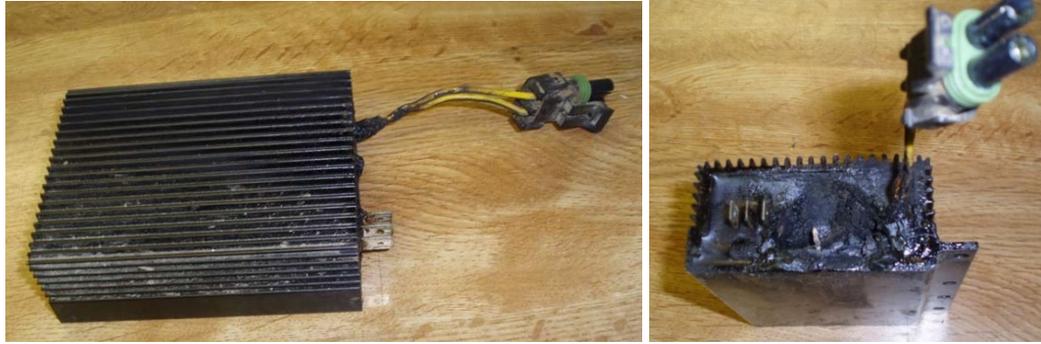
Example of Burned ATV ECM; Left Photo – Top View, Right Photo – Side View
